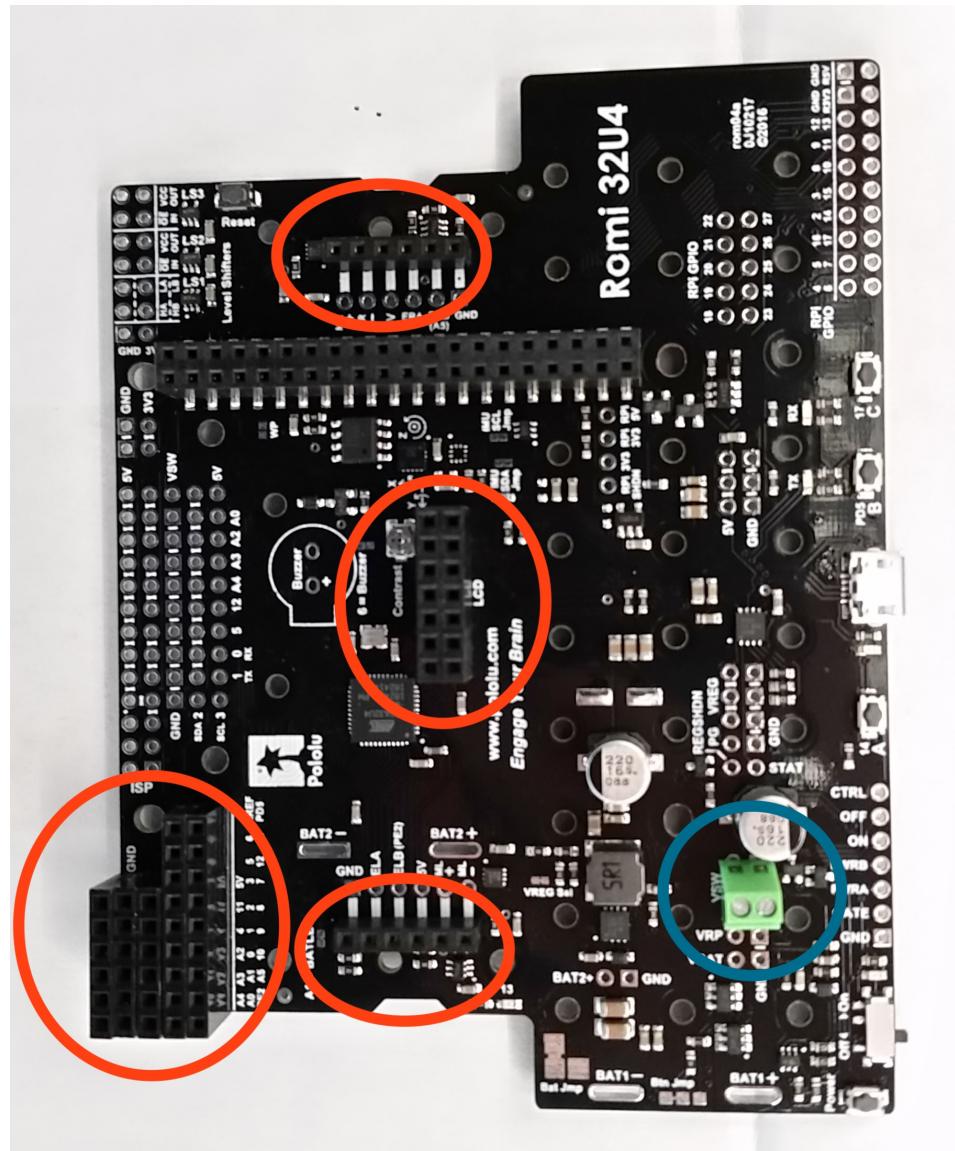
Control board with connectors soldered in. You may want to solder the buzzer in.
